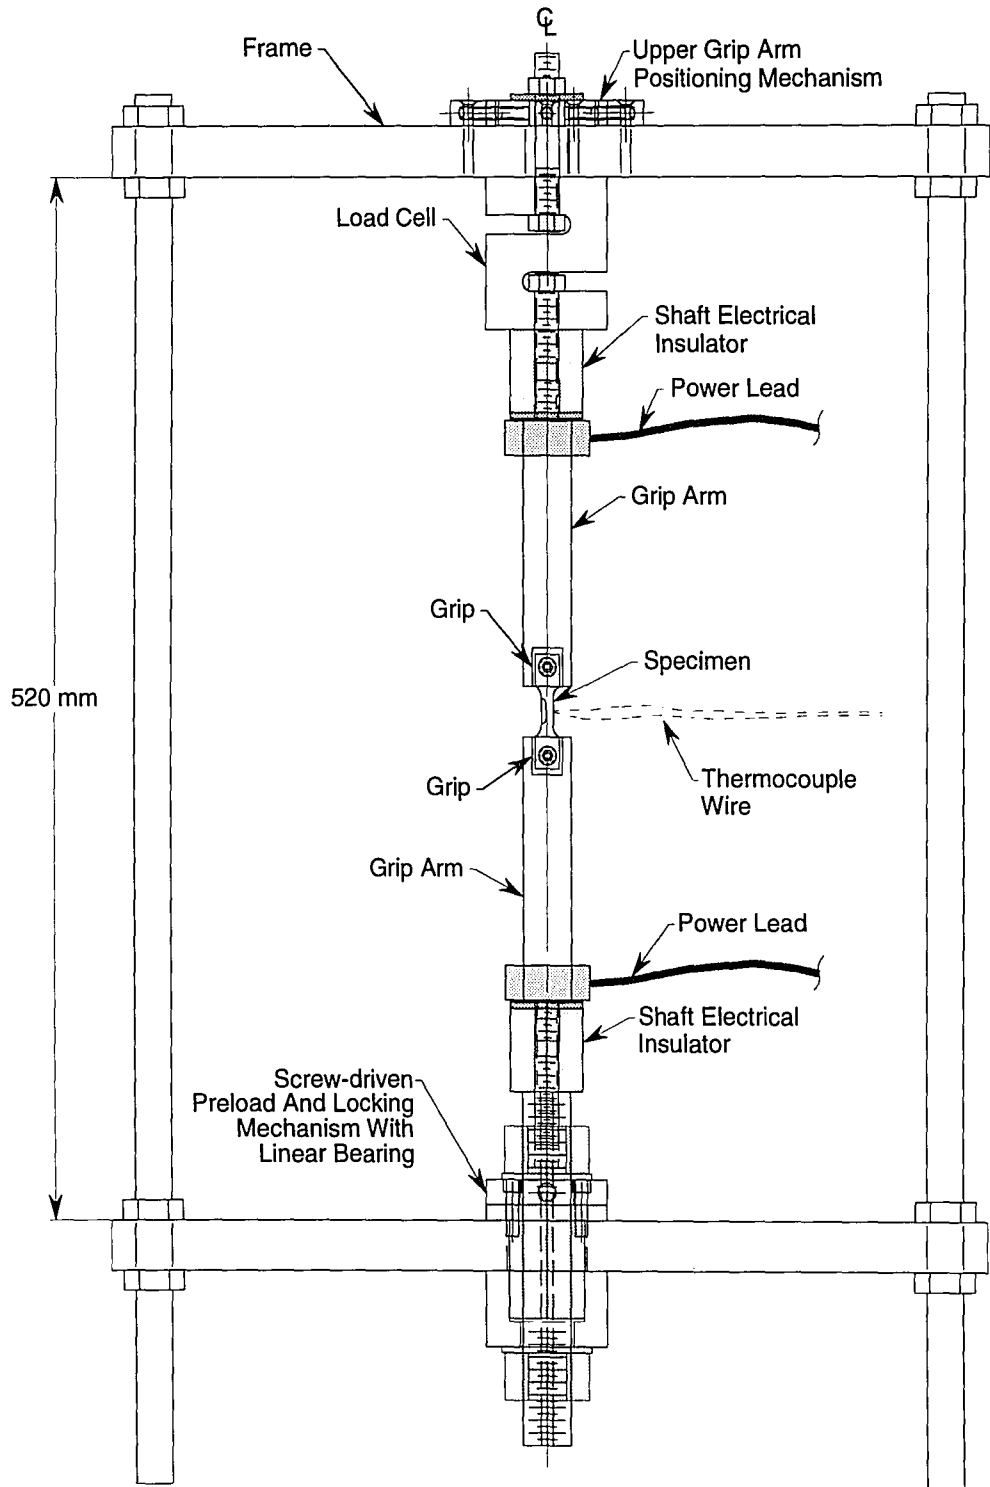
Assembly drawing of the thermal fatigue test fixture detailing the load train.
